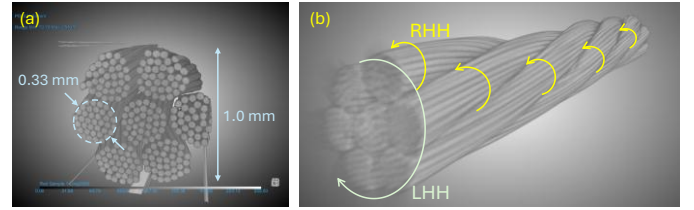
Tomography reconstruction images illustrating the size and twist of the roped strand construct.
